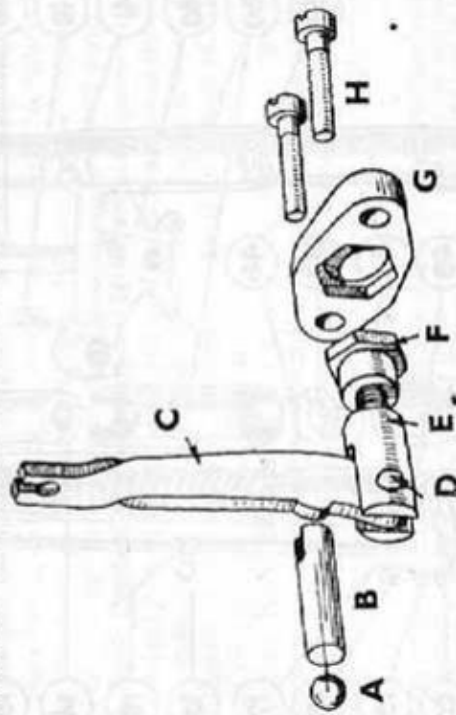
CLUTCH-OPERATING LEVER ADJUSTMENT
